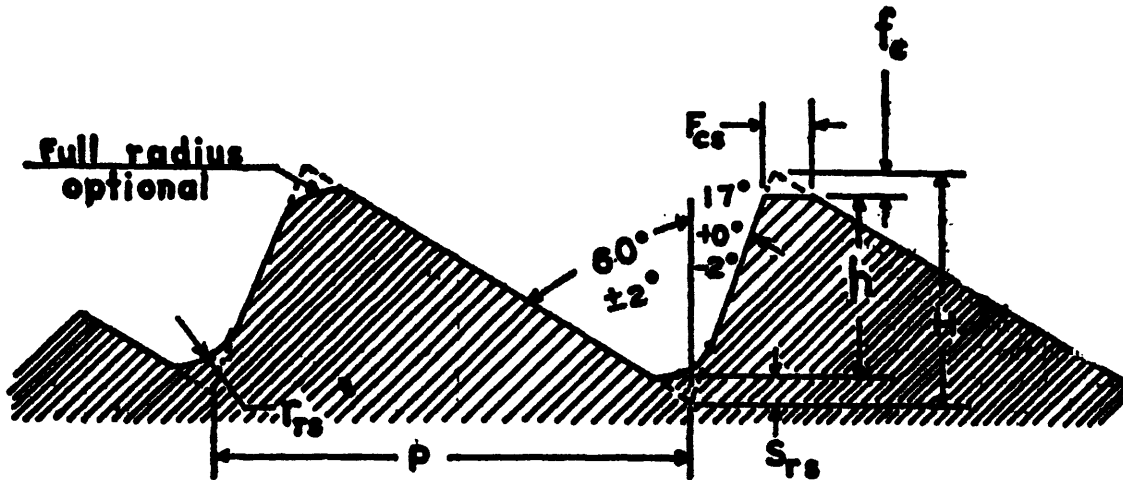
Recommended Thread Form for Fetter Drive Threads. (See table IV.)
